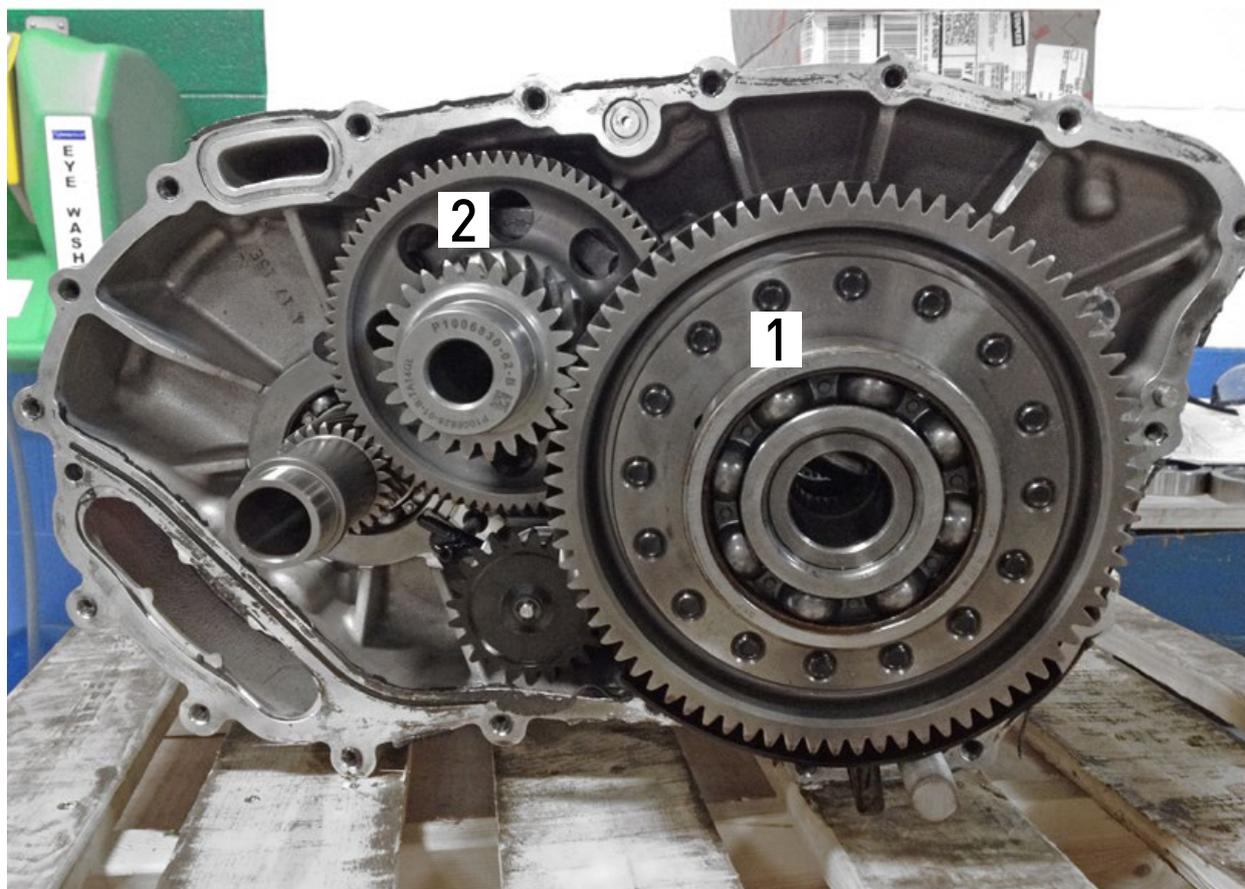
Tesla Model S transmission. Gear 1 is the output ring gear and gear 2 is the intermediate gear
